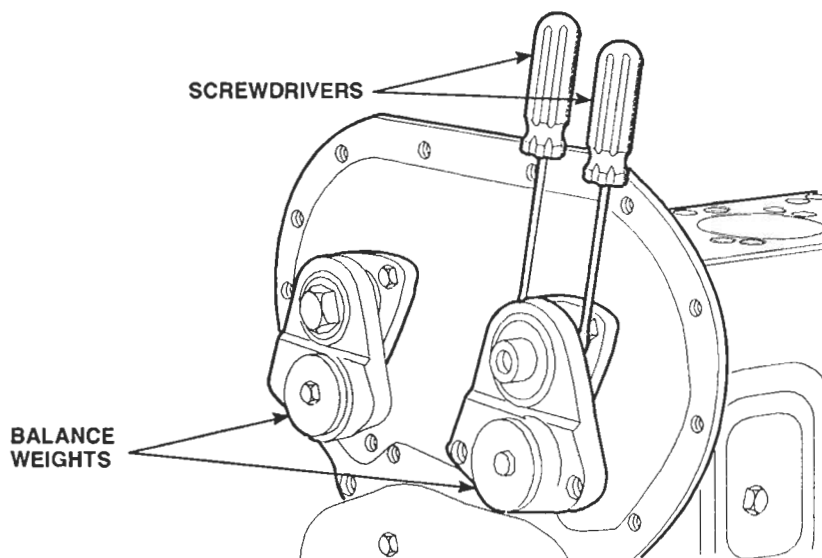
Nut Loosening on Camshaft or Balance Shaft
